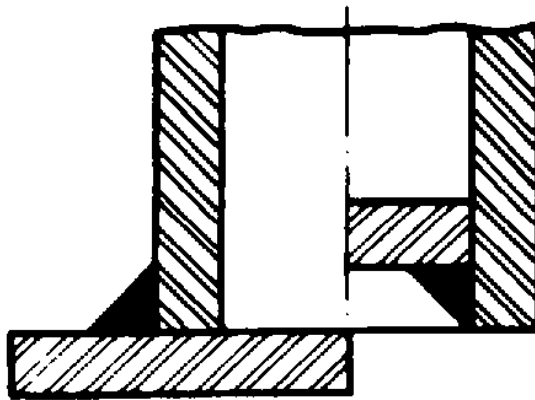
EXAMPLES OF ACCEPTABLE CORNER WELDS FOR PRESSURES NOT OVER 30 psi
